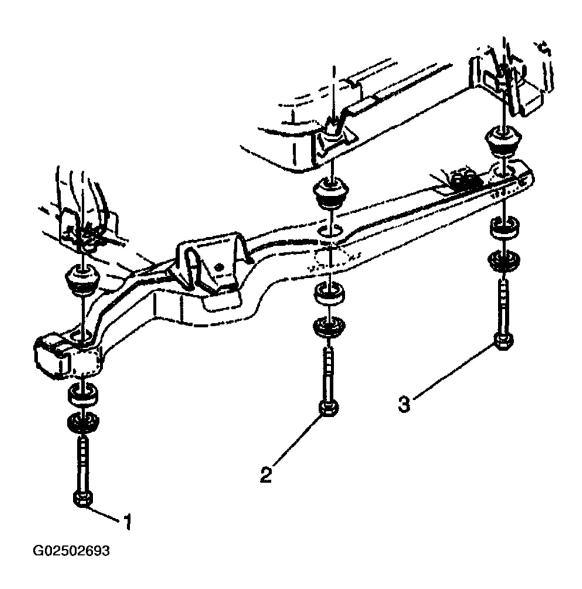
Identifying Frame-To-Body Bolts Courtesy of GENERAL MOTORS CORP.
